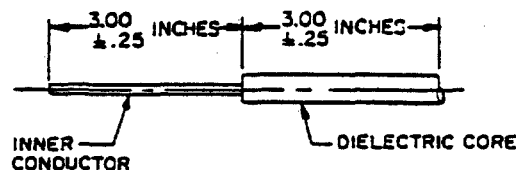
A: Stripping Dimensions for Flexible Cables.
